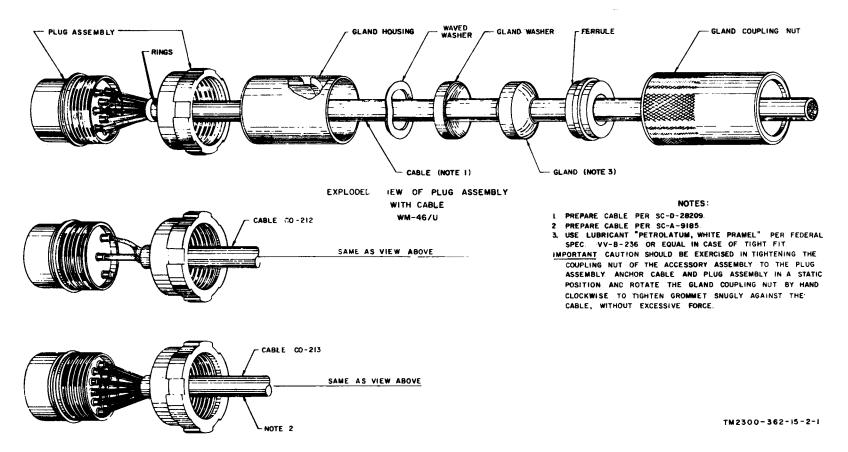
Assembly of waterproof vehicle terminal box plugs
